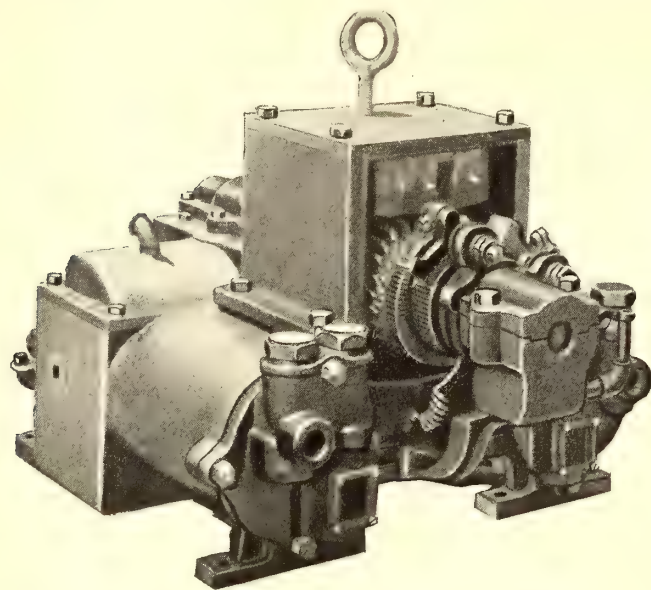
COMPLETE MOTOR AND AIR COMPRESSOR
